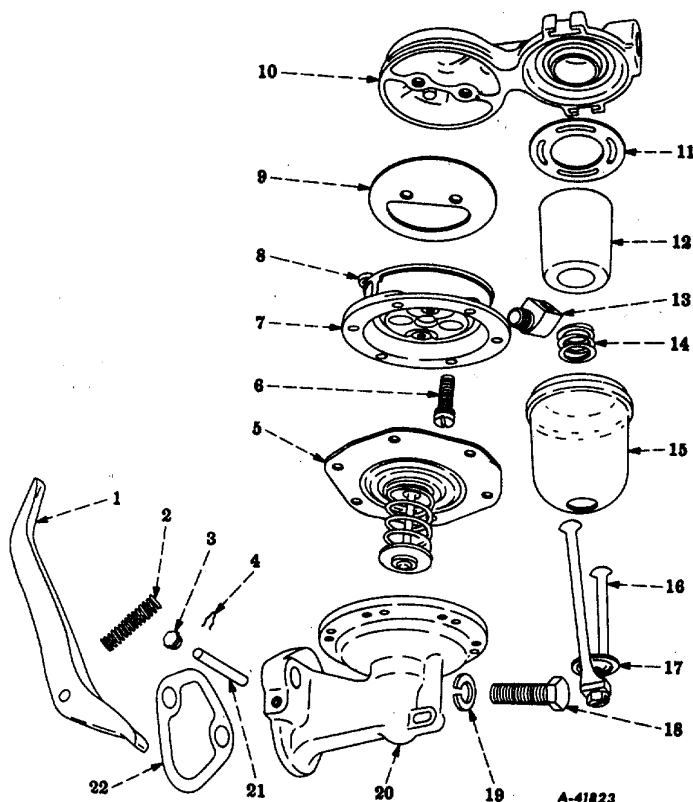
Exploded View of Side-Mounted Bowl Type Fuel Pump
